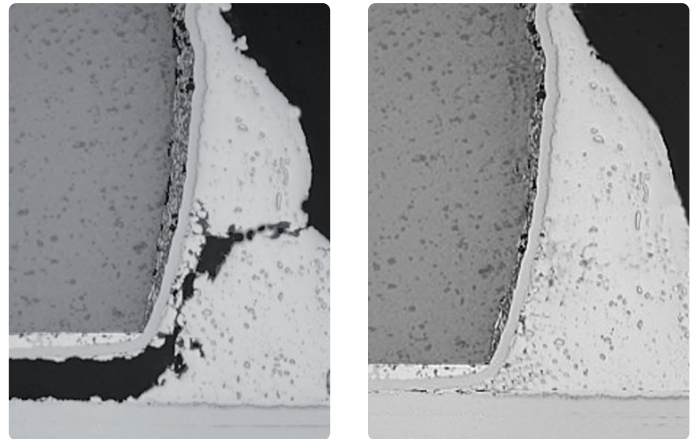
Electron microscope images of a cold solder joint (left) and a good solder joint (right) with good contact (source: Infineon).
